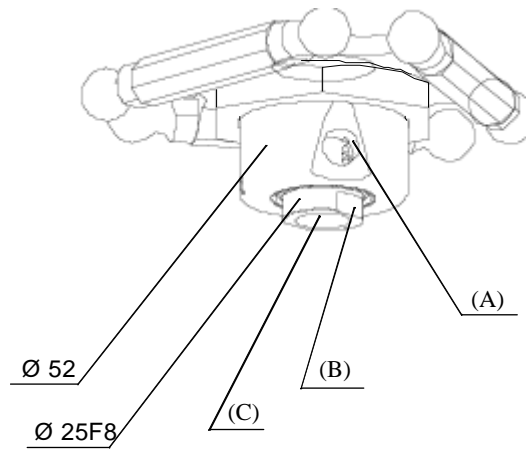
The mechanical interface (mounting flange), dimensions in mm.
